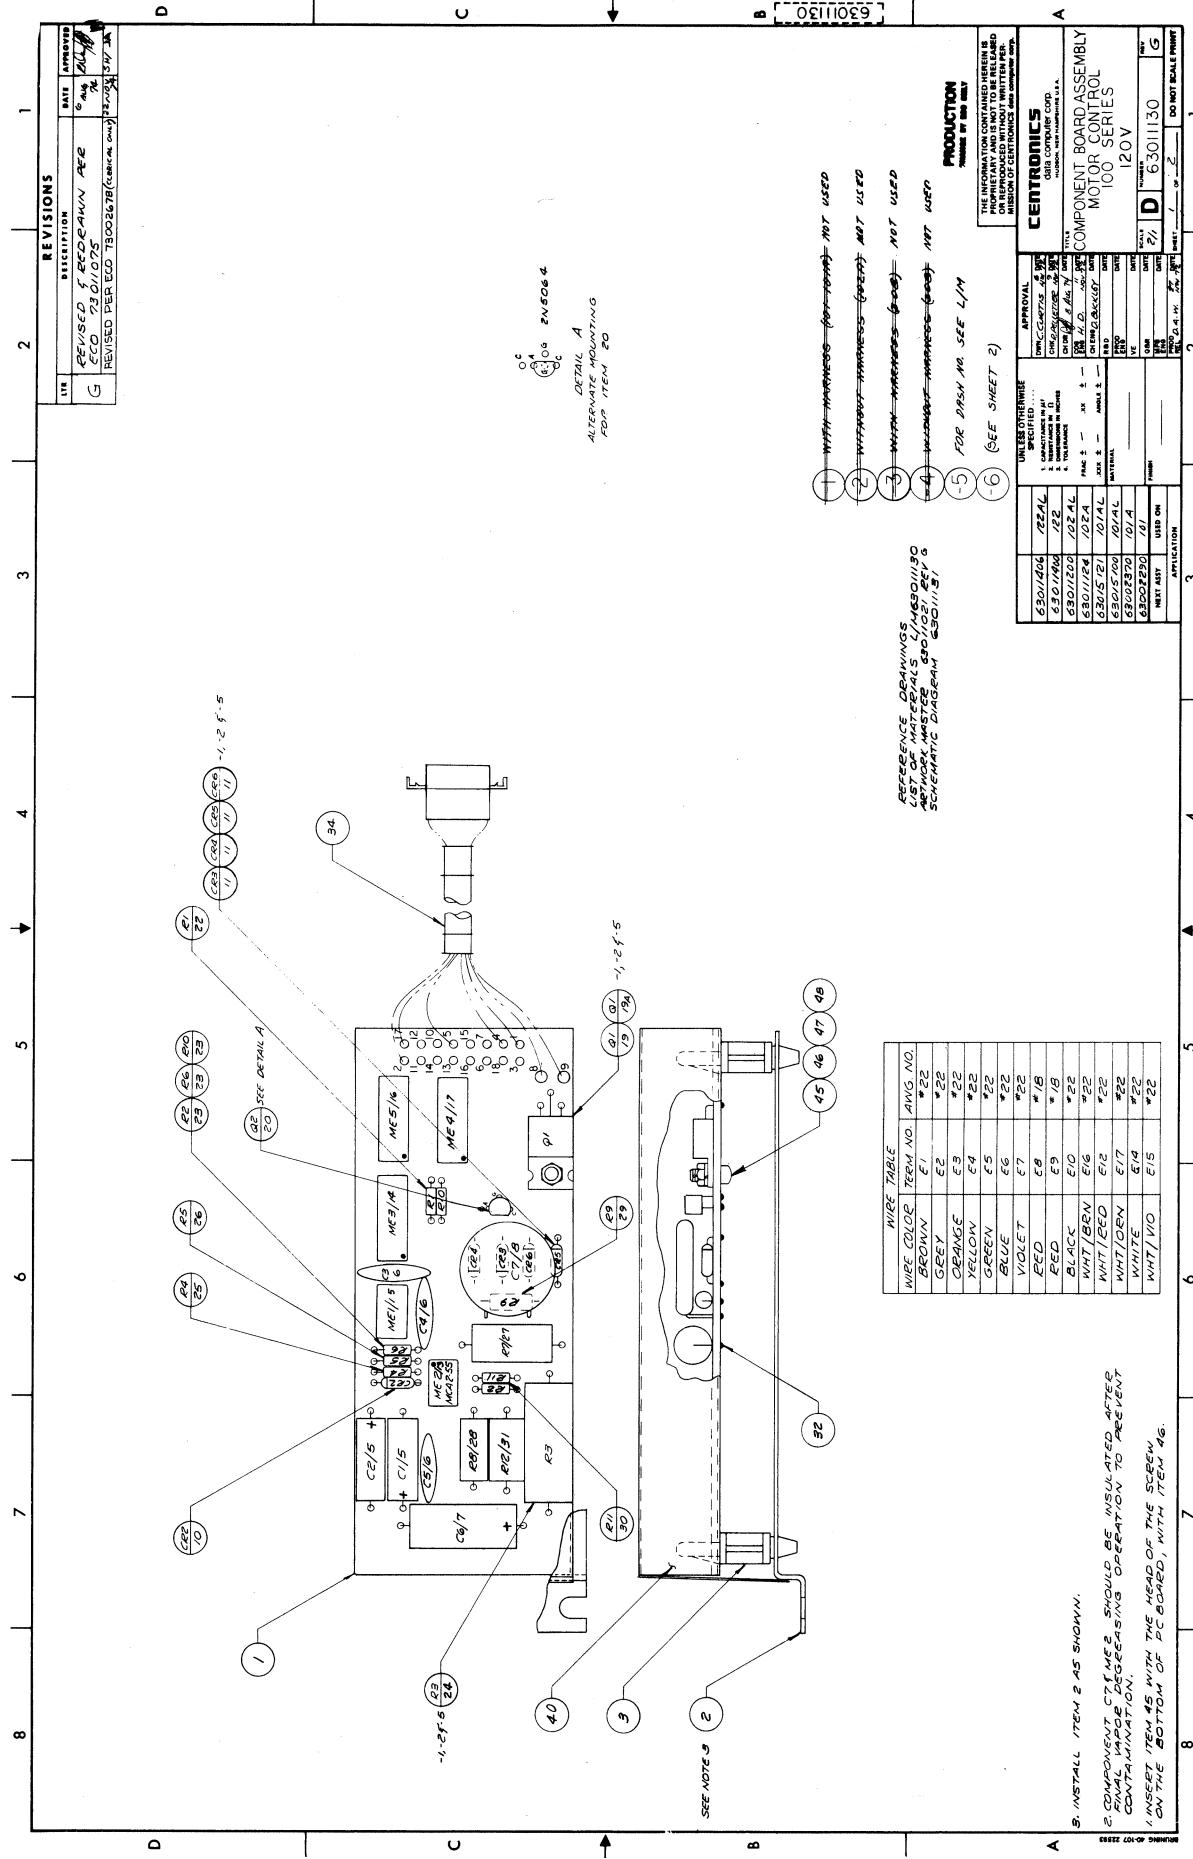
COMPONENT BOARD ASSEMBLY, MOTOR CONTROL
